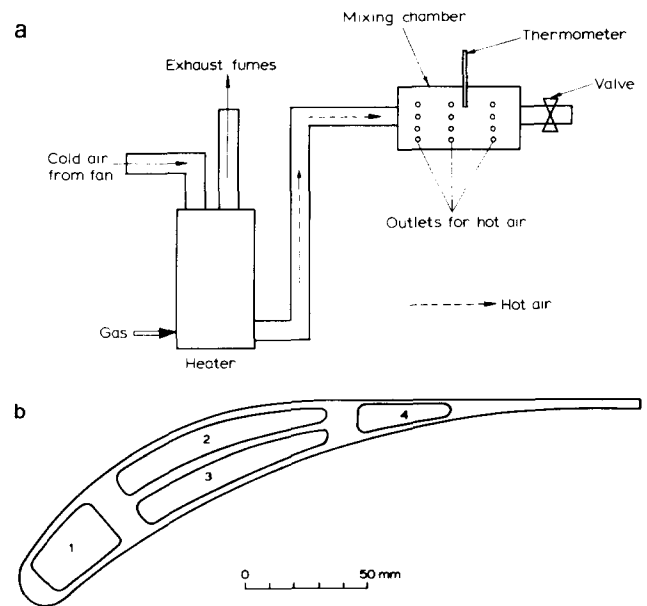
(a) Schematic layout of heating system (b) Cross section of interior heating chambers. All passages are single pass
